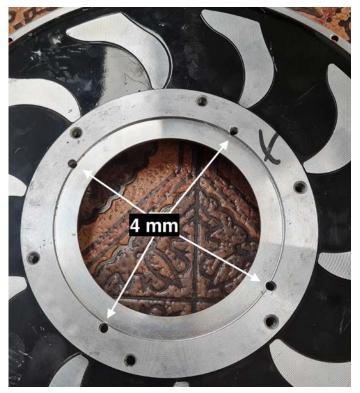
Drill 4 mm holes to tap out the bearing.
